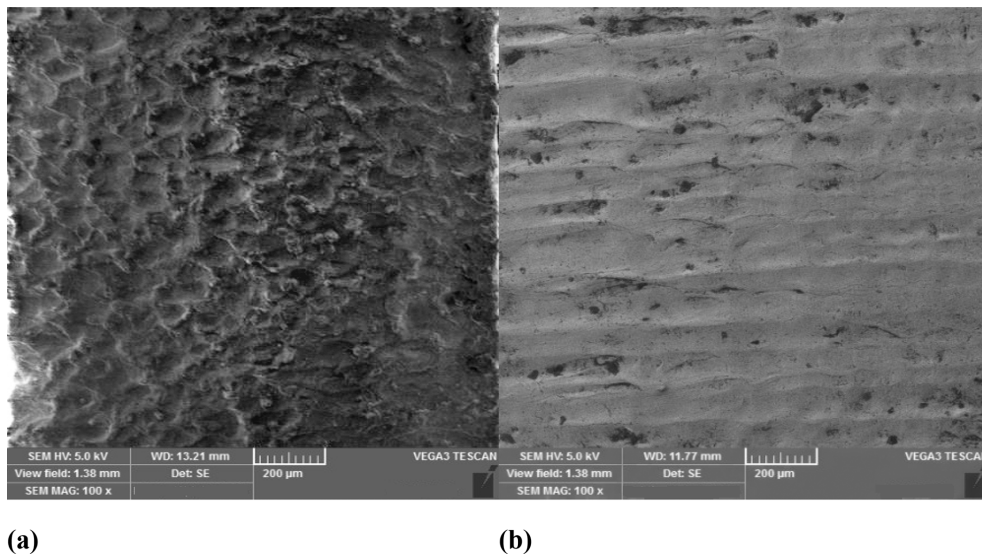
| SEM image of AISI 304 cut surface (a) EDM wire cut and (b) laser cut for 1.5 mm thick sheet.
